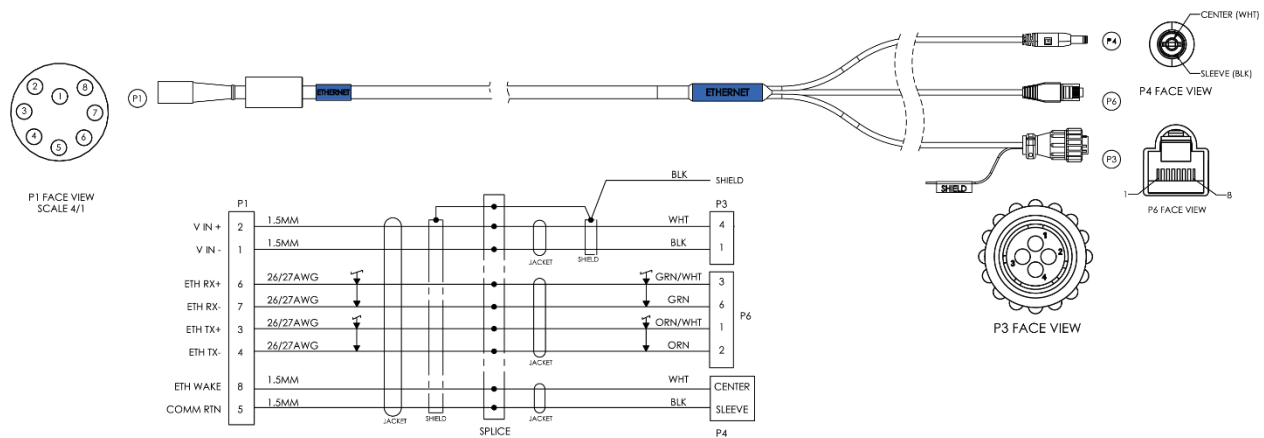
Ethernet Power/Comm Cable A73-6002-xxx Wiring
